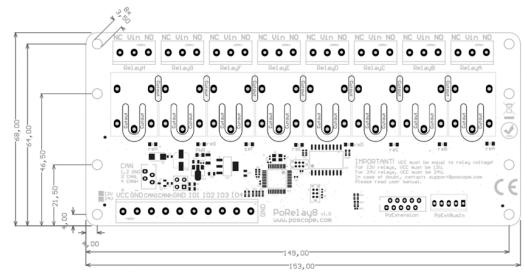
Mechanical Drawing and Dimensions of PoRelay8 Board
